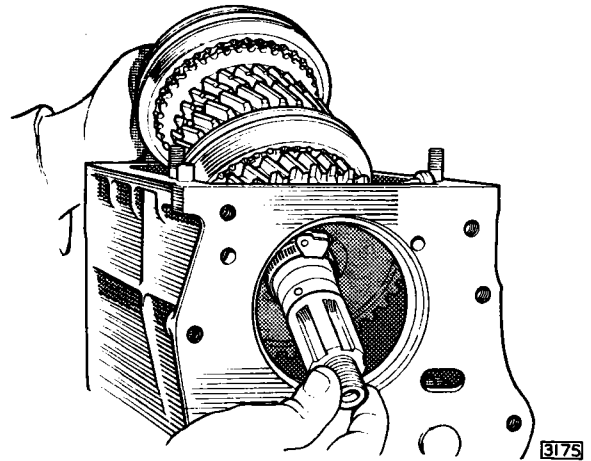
Removal of the mainshaft. Note the hose clamp fitted to retain reverse gear.
